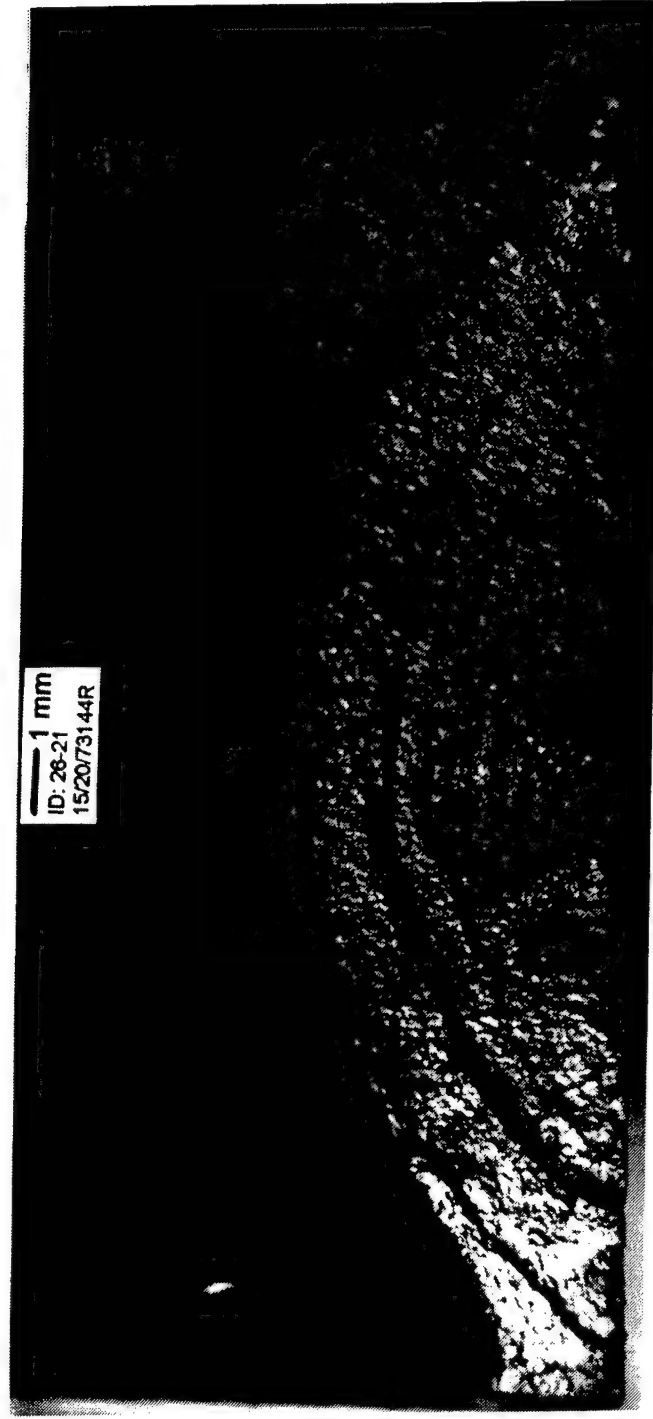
Fatigue fracture surface of the HSLA-80 but weld sample subjected to random loading:
